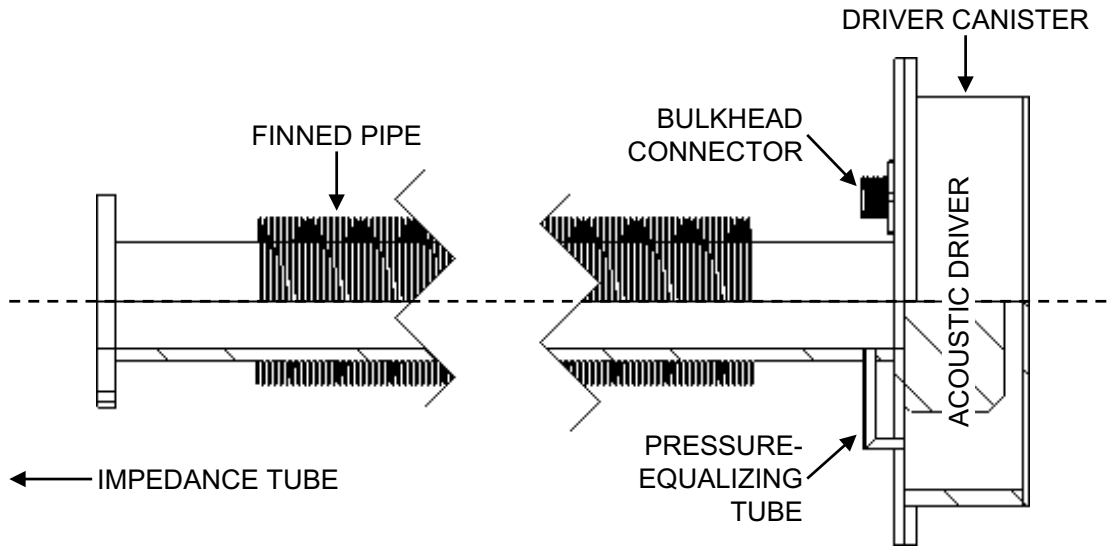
Partial cutaway view of the canister and finned-pipe heat exchanger assembly for the acoustic drivers.
